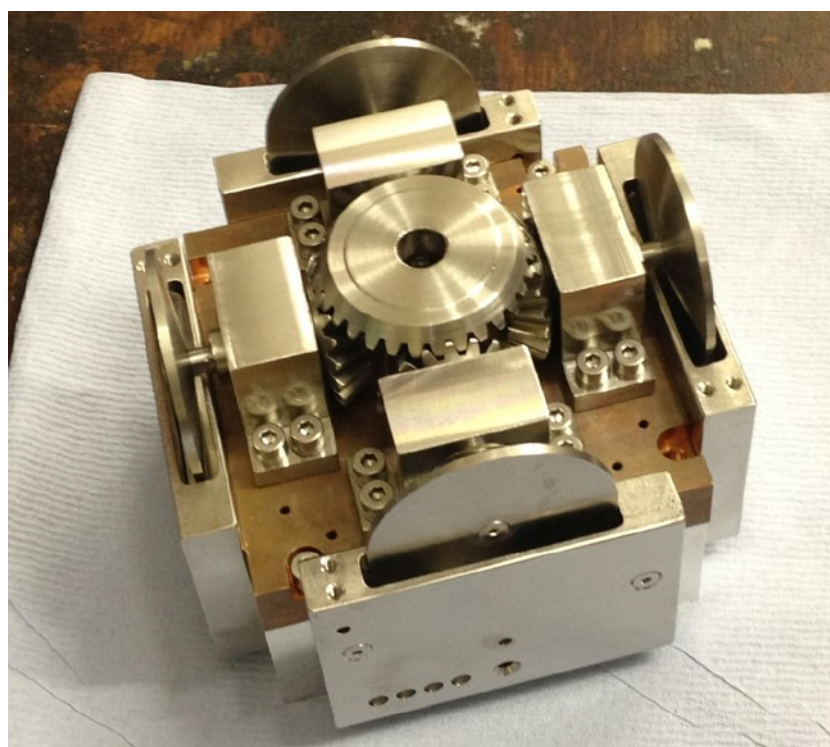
Photograph of the multiple-wheel assembly showing the top piece, gears, wheels and baths.
